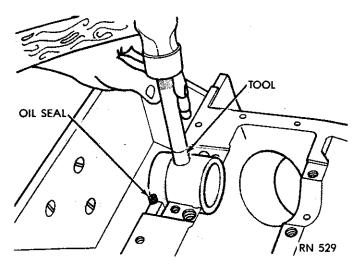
Installing Upper/Lower Oil Seal with Tool C-3511
